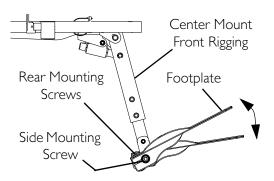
Adjusting the Footplate Angle - After 2/14/07
